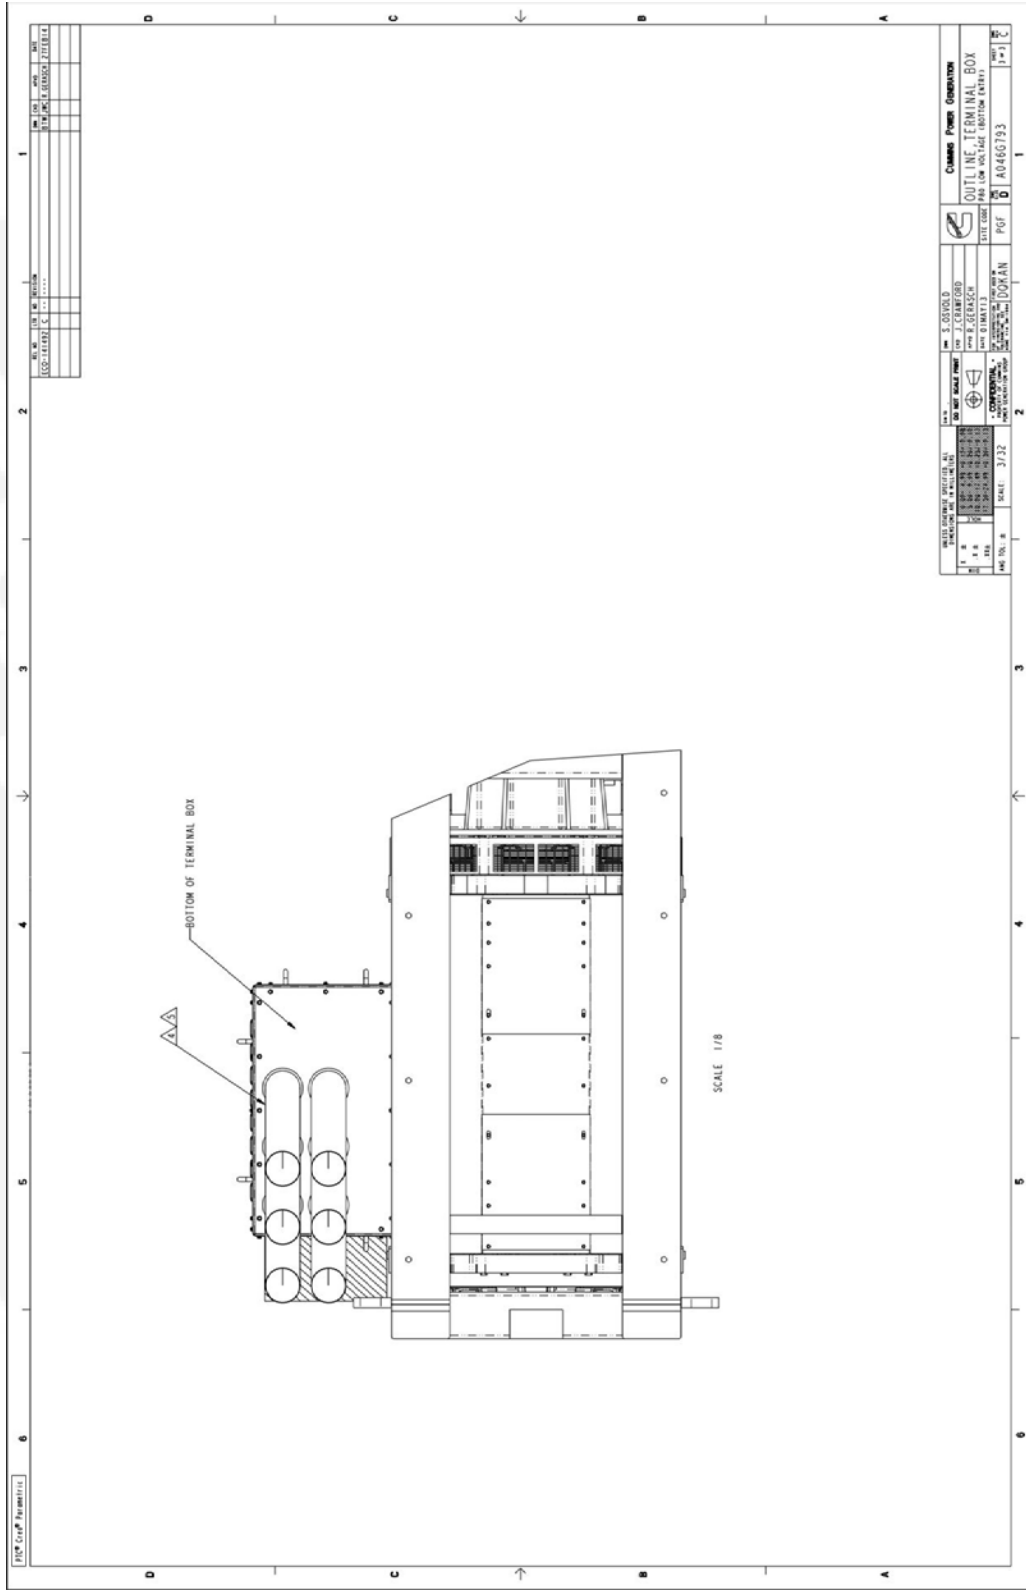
TERMINAL BOX OUTLINE, INSTALLATION CONNECTIONS (SHEET 2 OF 3)
